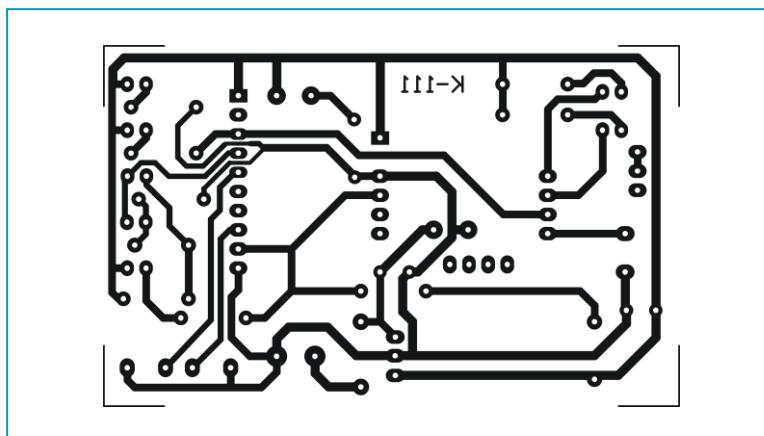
K-111 PCB map (Scale 1:1 Printable on board)
